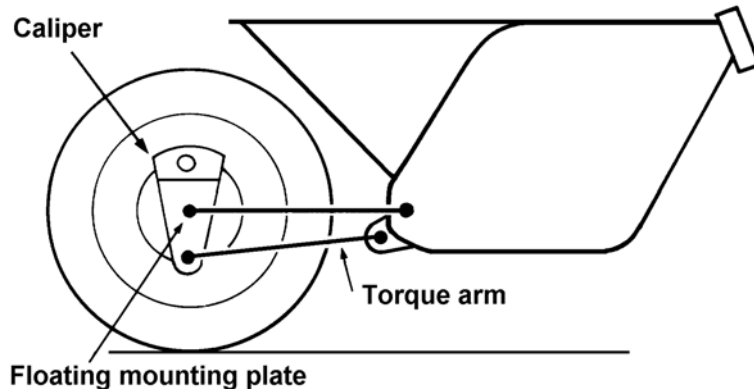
To prevent brake torque from compressing the rear suspension excessively, the caliper plate can be made free to rotate on the wheel spindle and linked to the main frame by a pivoted torque arm.
